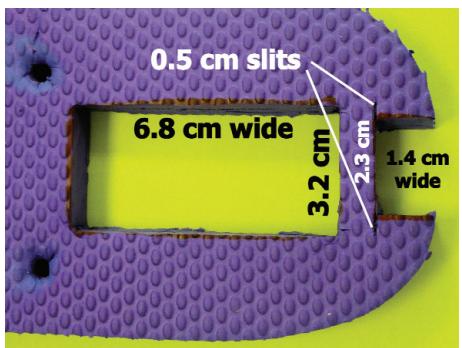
At the heel end of the flip flop cut out a 2.3×1.4 cm shape for the buzzer to fit in. The buzzer has two mounting sockets, to accommodate these cut two slots 0.5 cm in length. The slots will hold the buzzer in place. One centimetre from the buzzer opening cut out a rectangle 6.8×3.2 cm for the battery holder.
